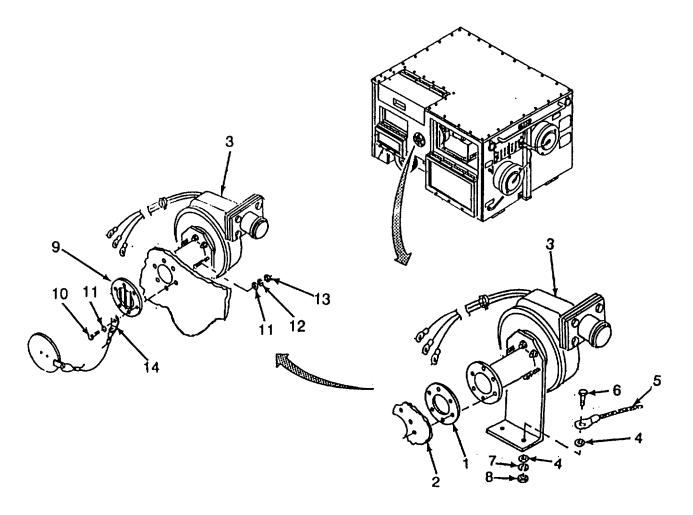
Combustor Fan Assembly Installation (Sheet 1 of 2)
